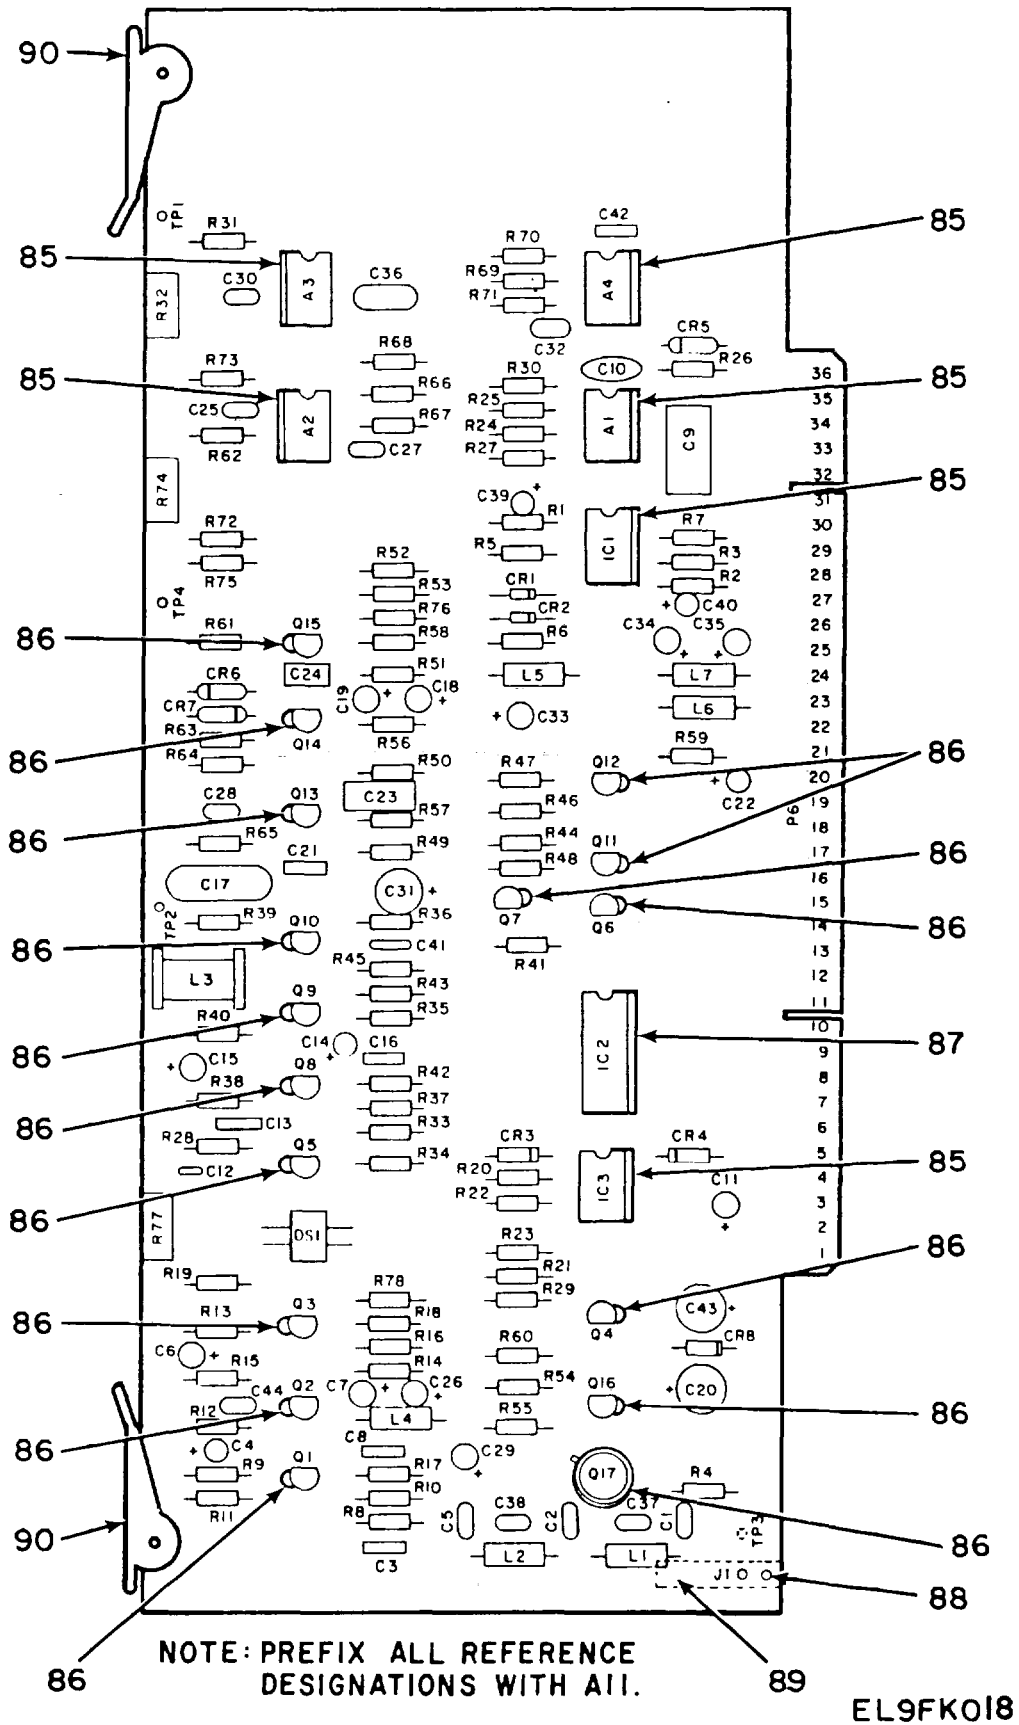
CIRCUIT CARD ASSEMBLY, AM (A11), (SHEET 1 of 2).
